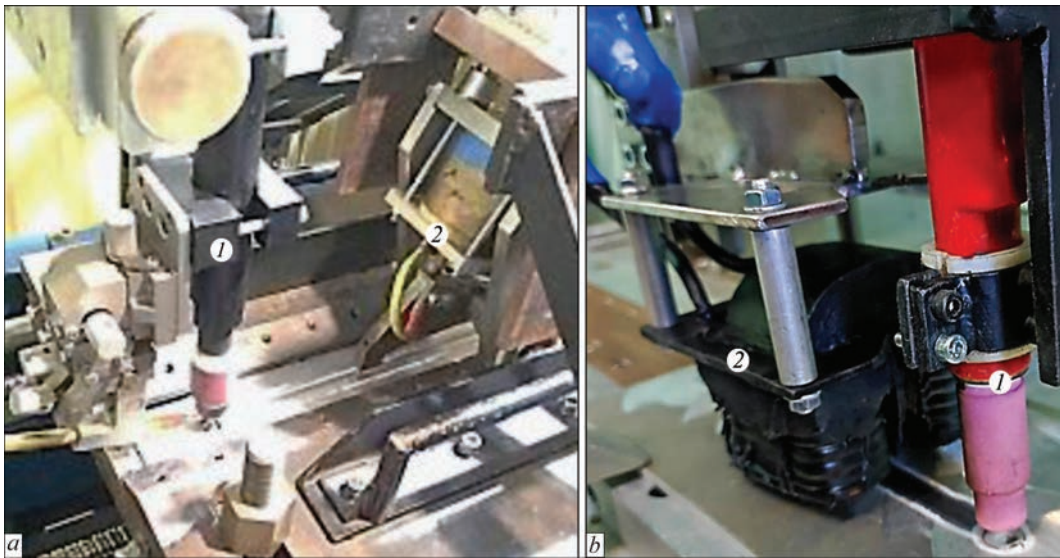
Appearance of equipment for hybrid welding technologies: *a* — “TIG welding + electrodynamic treatment” [36]: 1 — TIG torch; 2 — electrode system for this treatment [36]; *b* — “TIG welding + pulsed electromagnetic field treatment” [41]: 1 — TIG torch; 2 — inductor for this treatment [41]
